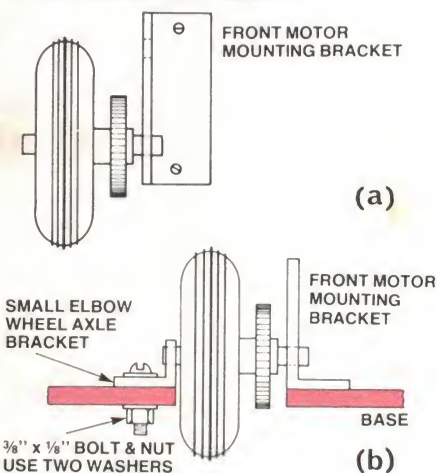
Mounting the wheel assembly to the left hand front motor bracket. (a) Insert the nylon gear end of the axle in the appropriate hole in the front motor bracket (view looking down). (b) Support the other end of the axle with the small axle elbow bracket and temporarily bolt it in place. The right hand wheel assembly mounts in a similar way.
